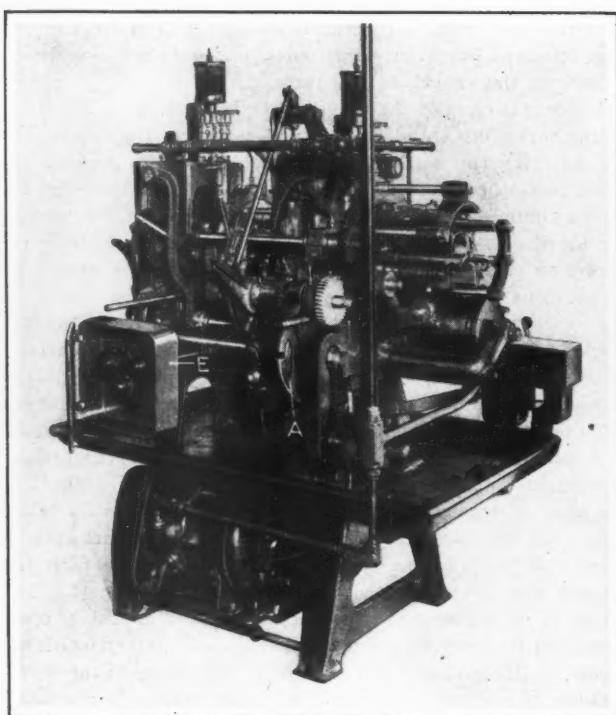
Rear View of the Automatic Screw Machine illustrated in Fig. 1
